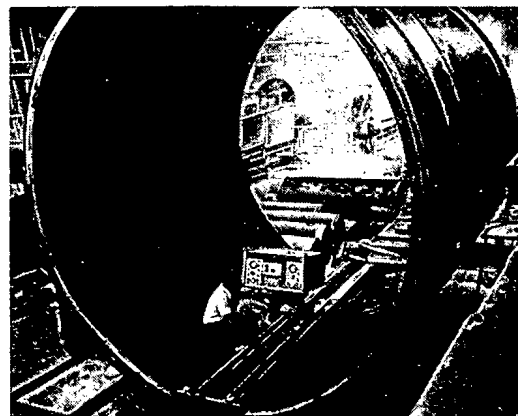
Automatic device for ultrasonic inspection of welded seams.
